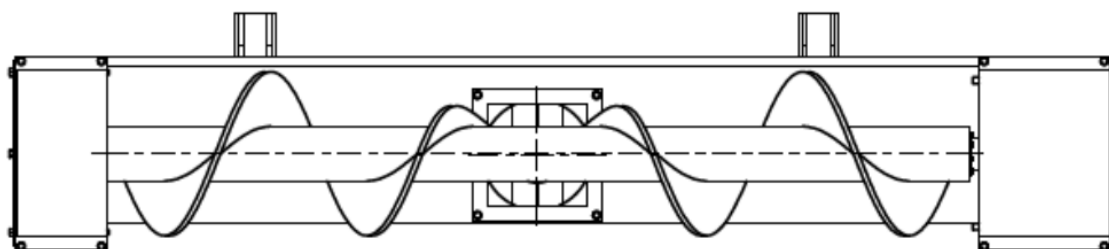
SCHEMATIC DRAWING OF AN AUGER DREDGE HEAD [8]
